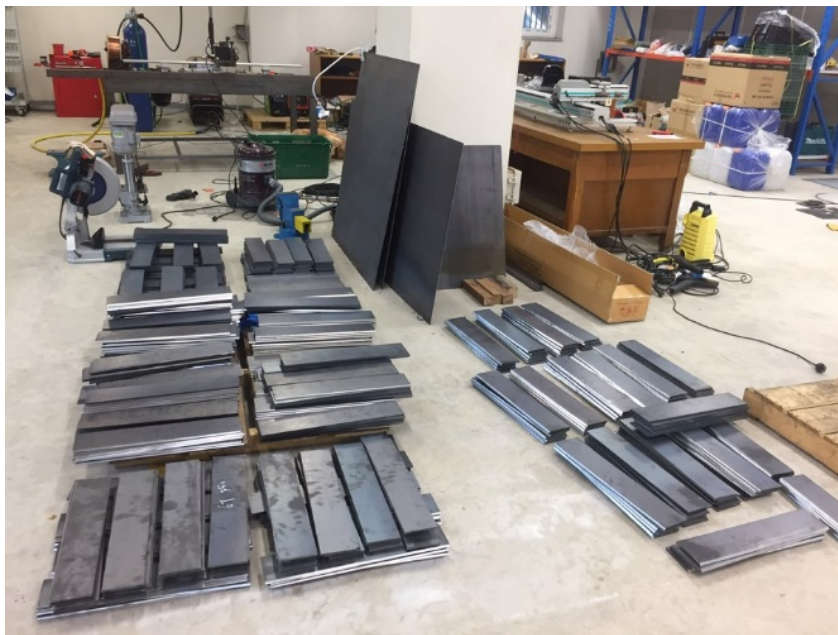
SS400 metal plates used for the welding experiments.
